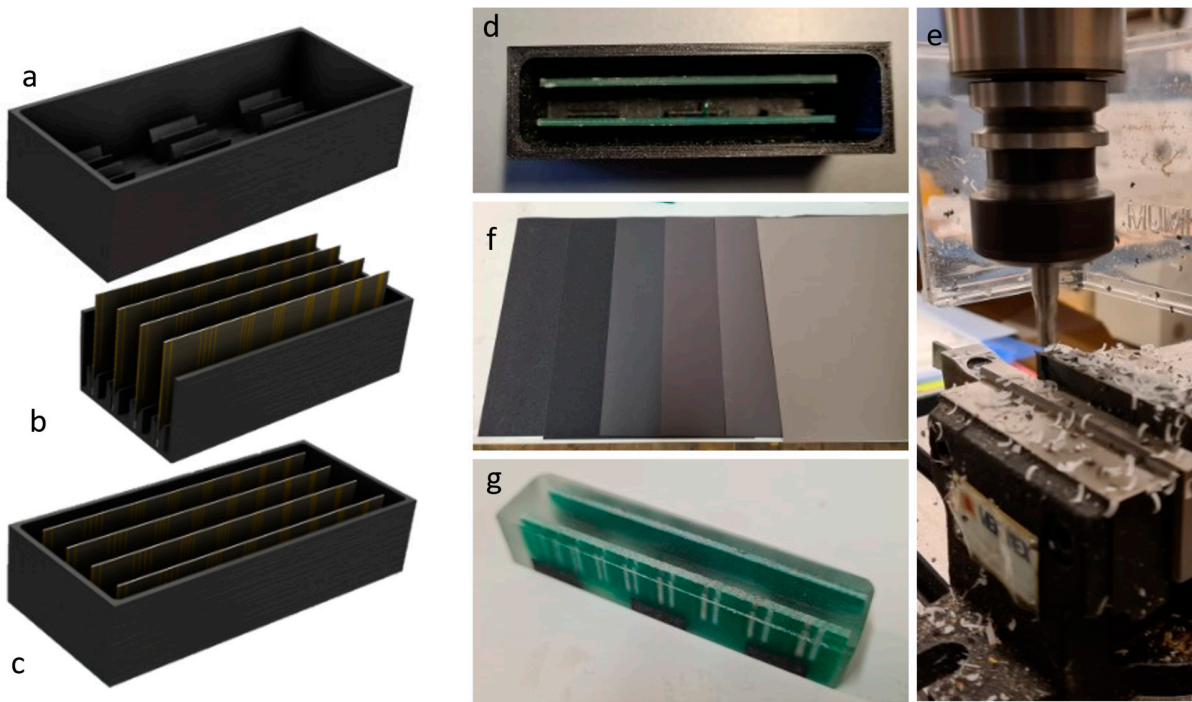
Sequential representation of the PCB cross sectioning. (a) Depicts an empty 3D-printed mold. (b) Shows a cross-section of the 3D-printed mold with flexible PCBs inserted. (c) Presents the mold after trimming the PCBs. (d) Displays the 3D-printed mold securely holding cut FR-4 PCBs. (e) Reveals the epoxy cast within the 3D-printed mold with the FR-4 PCB enclosed. (f) Highlights a range of sandpapers, progressively increasing in fineness for surface refinement. (g) Illustrates the epoxy casting with the FR-4 PCB fully encased being milled to reveal the cross-sectional view.
